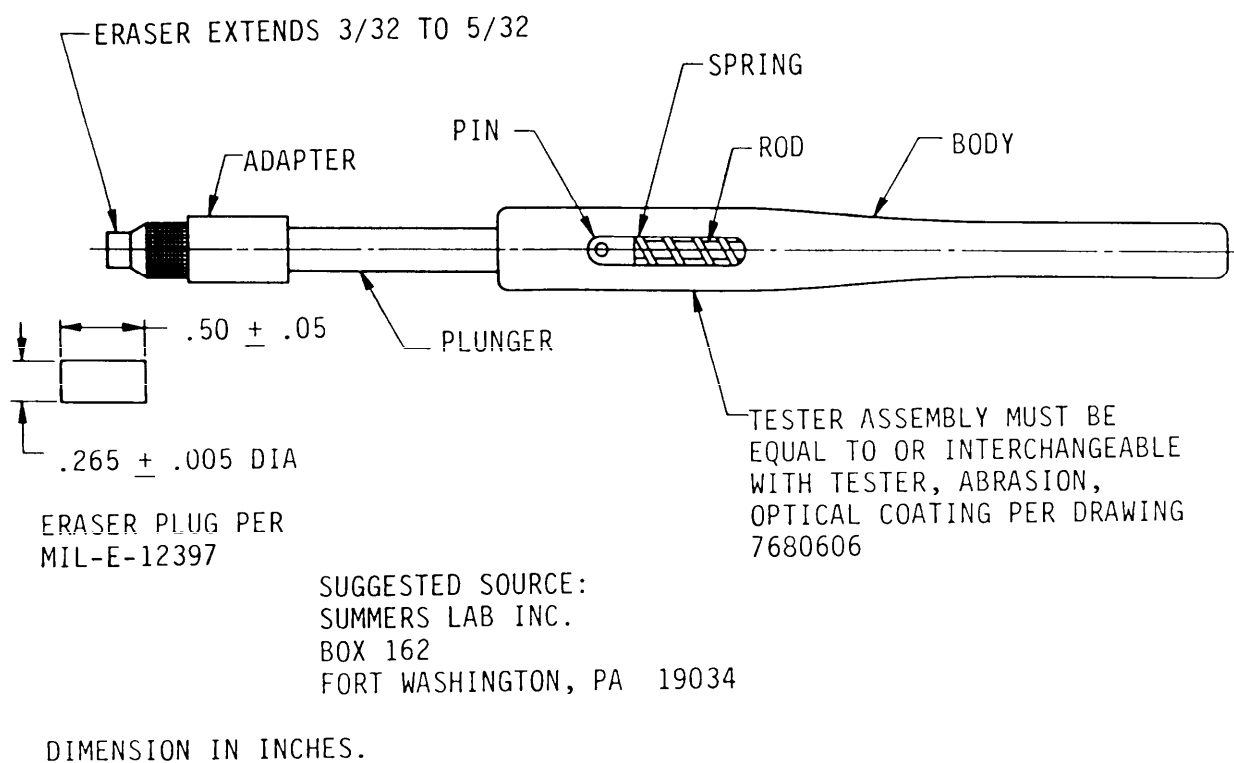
Eraser abrasion tester assembly and eraser plug.
